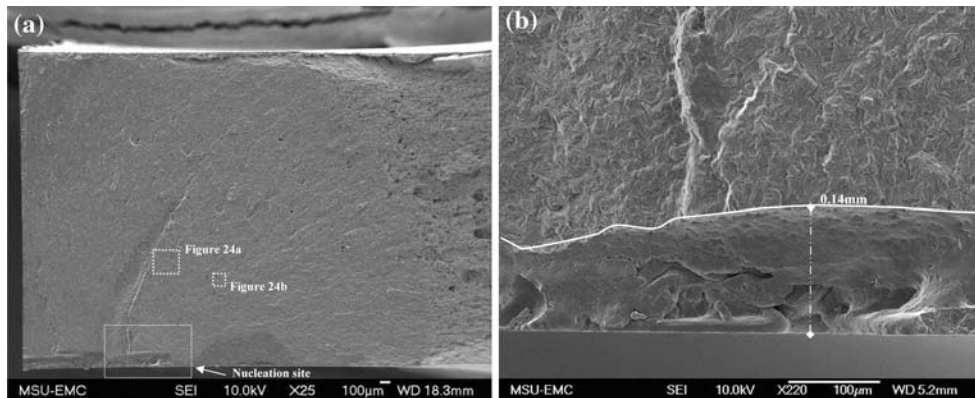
FEG-SEM fracture surfaces of sample E_1 ($N_f = 6085$) cut from an AZ91 alloy plate showing (a) an overall view of the fracture surface and (b) a higher magnification of the region, including the large surface shrinkage pore that nucleated the main fatigue crack. Note that the pore extends along the sample free surface.
